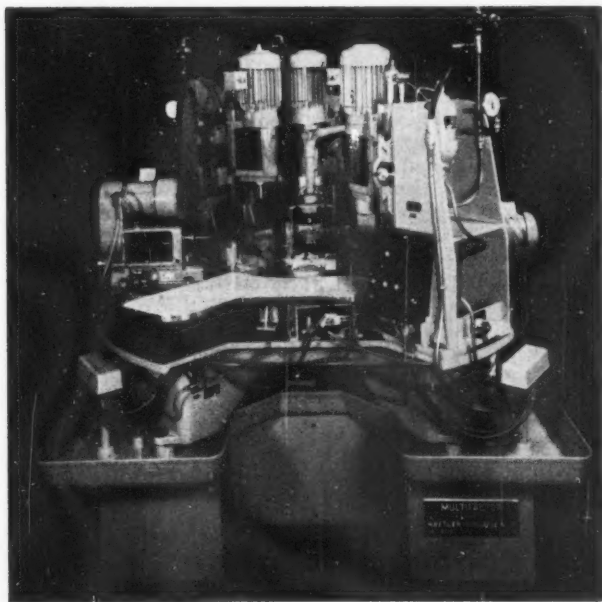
The vertical-spindle heads are mounted on compound slides with power feeds, and may be fitted with right-angle drive attachments for side and face milling cutters, as here shown
